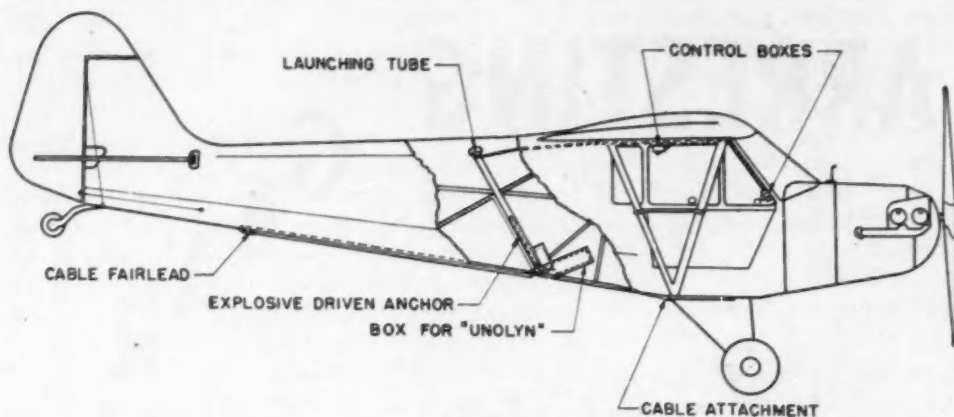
Schematic view of installation of arrester equipment in Piper Cub
